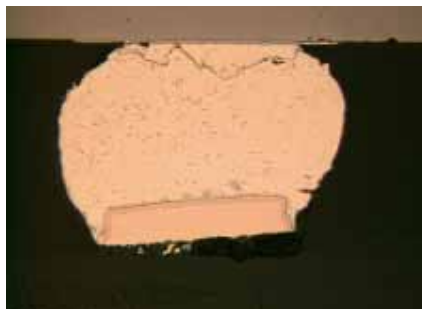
Cu-pad lift off from PCB and solder crack after thermal cycling (1500x)
